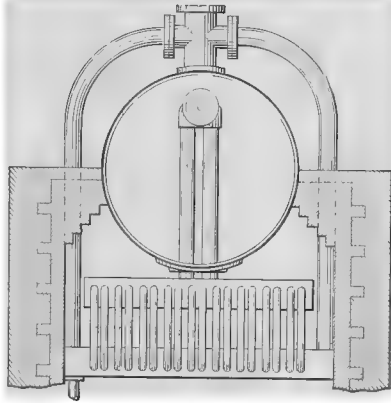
Cross-section Babcock & Wilcox superheater.
